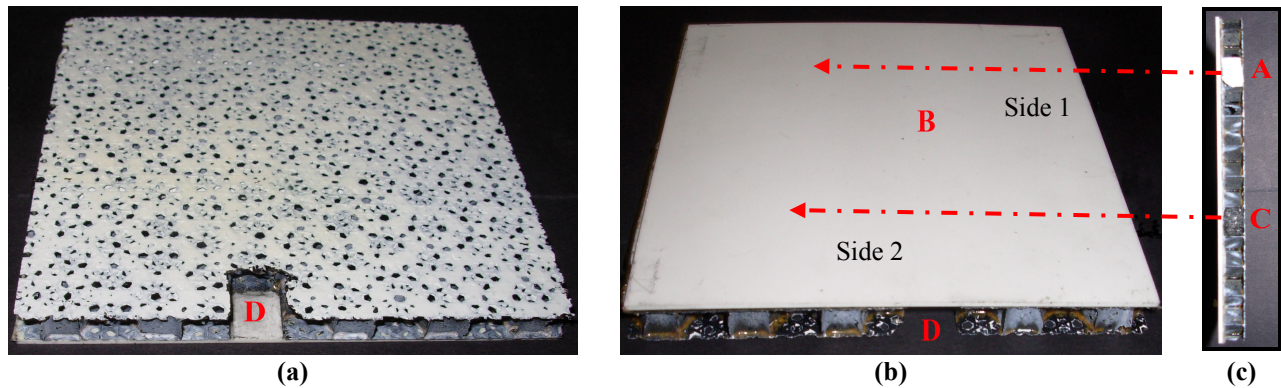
Sandwich CMC/carbon fiber specimen (a) rear view showing the sandwich structure, (b) top view showing the approximate location of defects A, B, C and D, (c) lateral view showing the cross-section of fabricated defects A and C.
